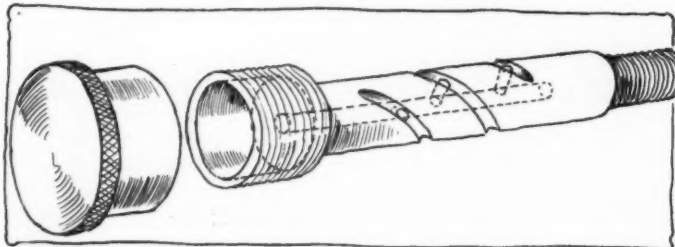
Lubrication of spring bolts in which spiral groove distributes to entire bolt surface
